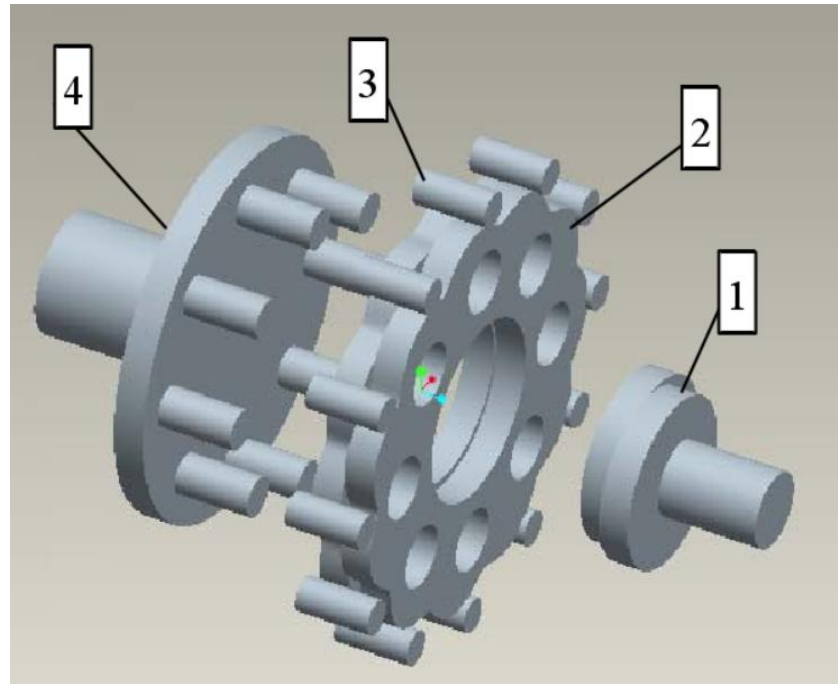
Block diagram of the mechanism with a cycloidal-pinned gearing.
